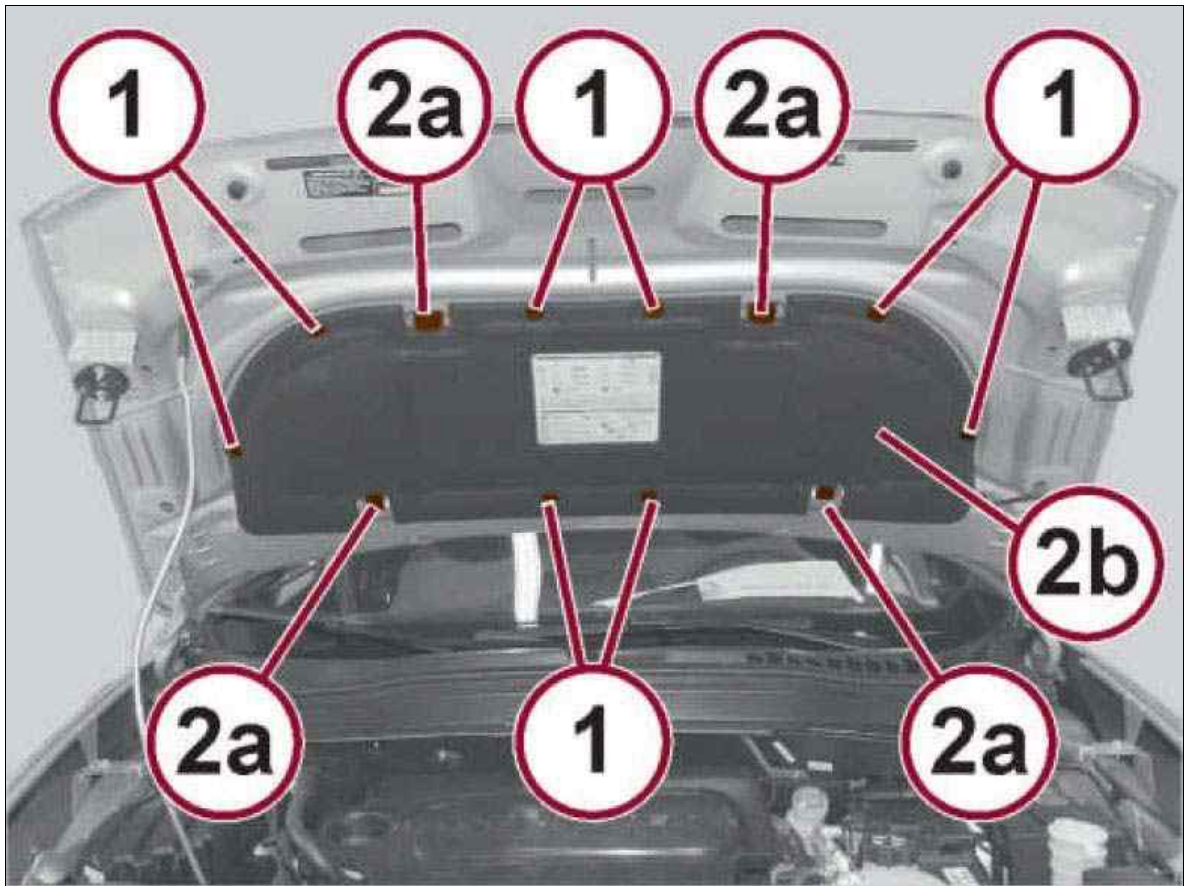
Supply Hose, Washer Nozzles & Fasteners
